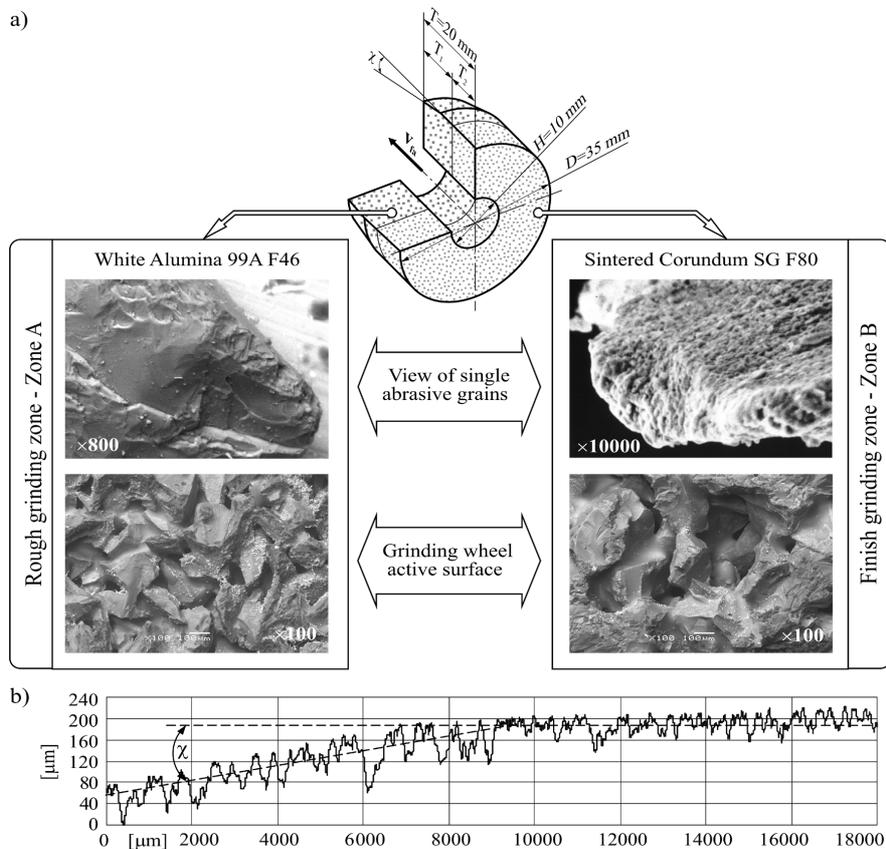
Example of structure of the grinding wheel for single-pass internal cylindrical grinding: a) view of single abrasive grains and grinding wheel active surface, b) microgeometrical axial profile of the grinding wheel active surface with an exposed conical chamfer angle χ [9]
